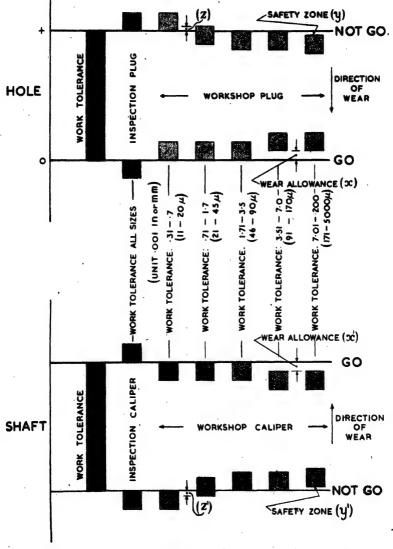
DISPOSITION OF B.S. 969 LIMIT GAUGE TOLERANCES
